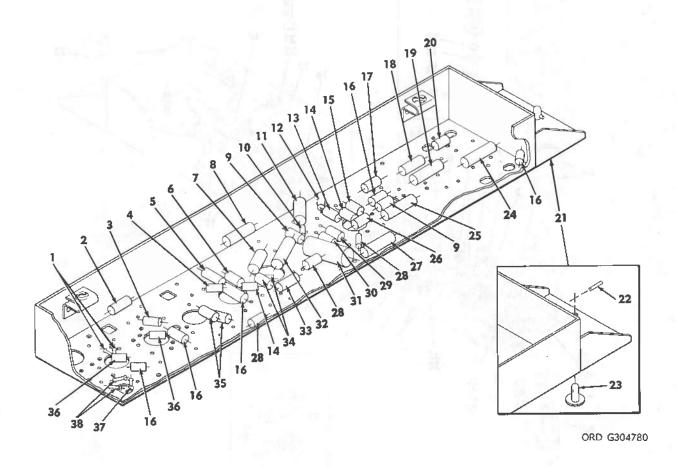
CONTROL, RECEIVER C-14968/M /8607339/-PARTIAL EXPLODED VIEW
